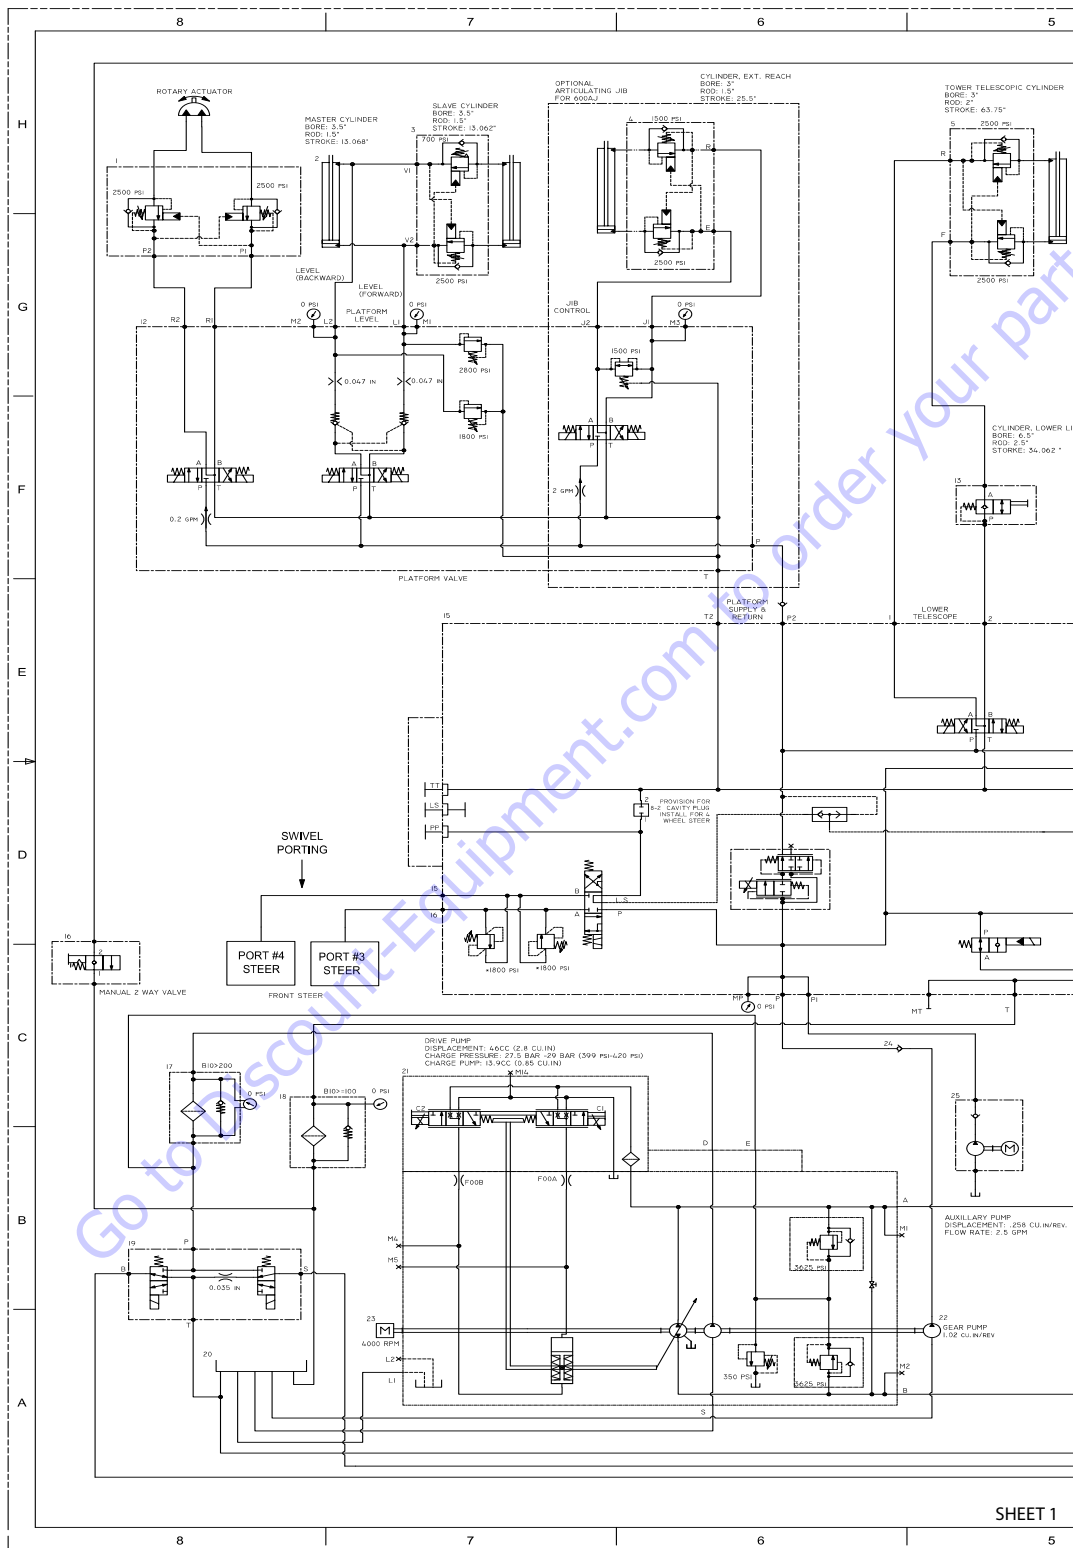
Hydraulic Schematic (2 Wheel Steer)- Sheet 1 of 8
